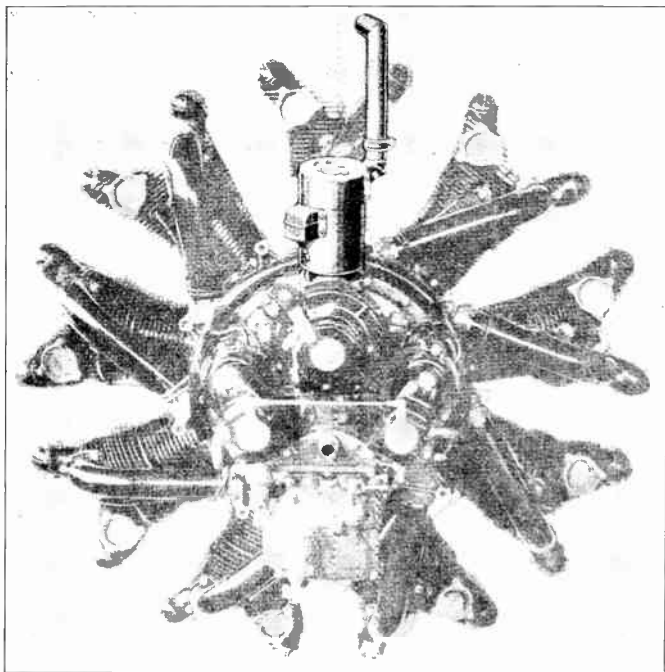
Generator geared to Pratt and Whitney "Wasp" engine
